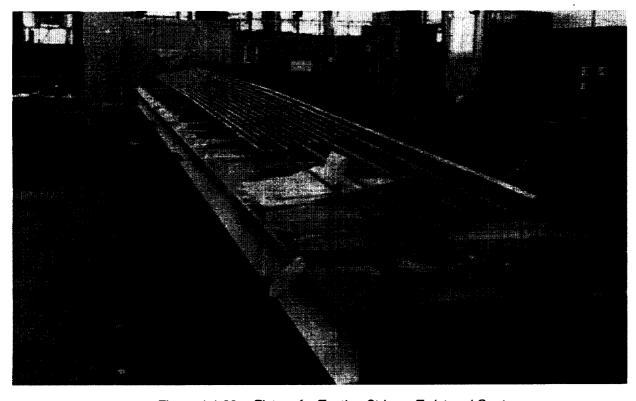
Fixture for Testing Stringer Twist and Contour
